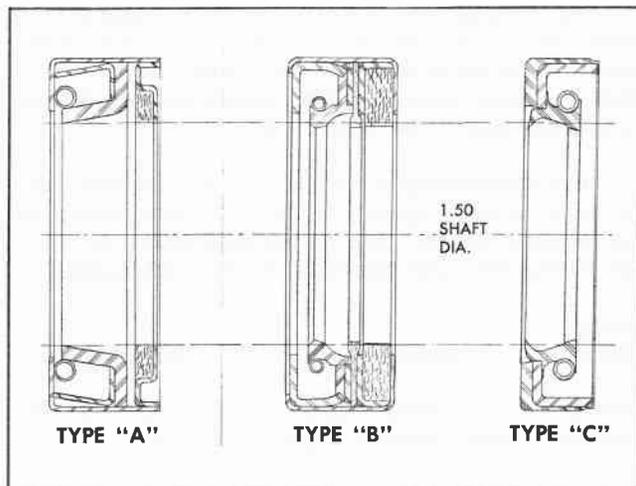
Three Types of H.M. Rear Bearing Oil Seals
